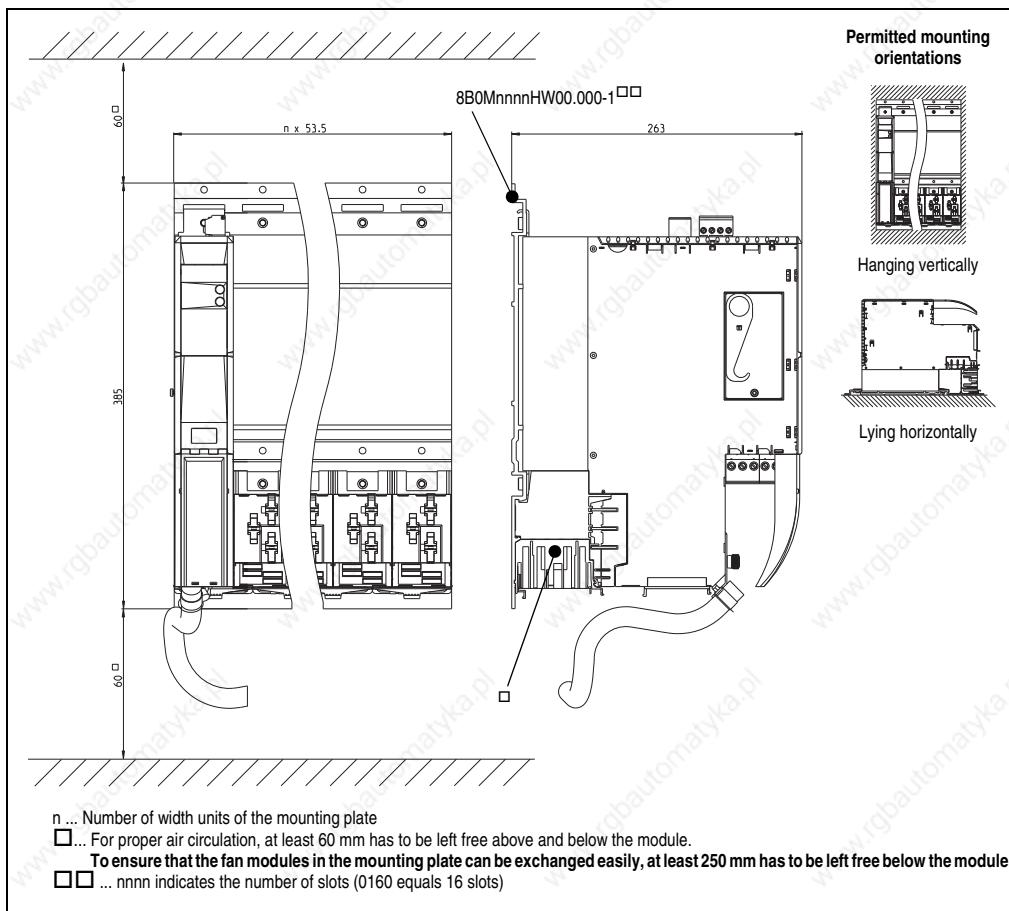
Dimension diagram and installation dimensions - 8BVE0500HW00.000-1
